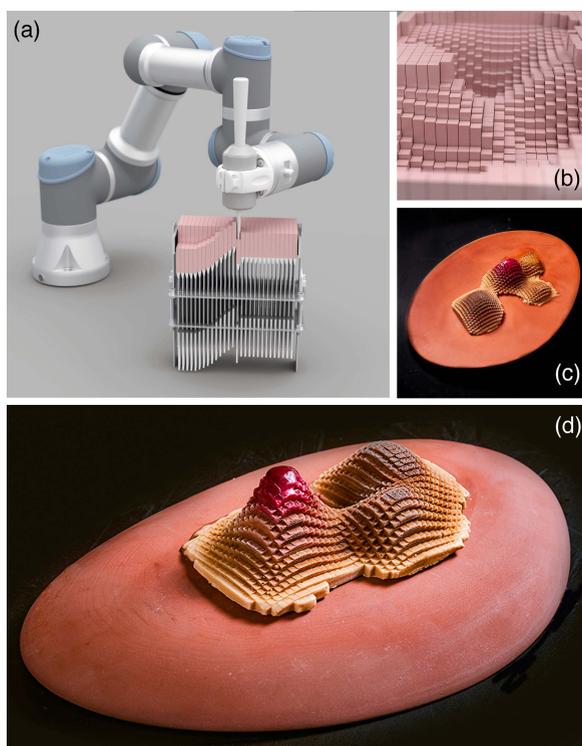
(a) Illustration of a robot arm modifying a programmable silicon mold. (b) Mold. (c) and (d) Two versions of a mousse dessert, exemplifying the potential of the modular mold.
